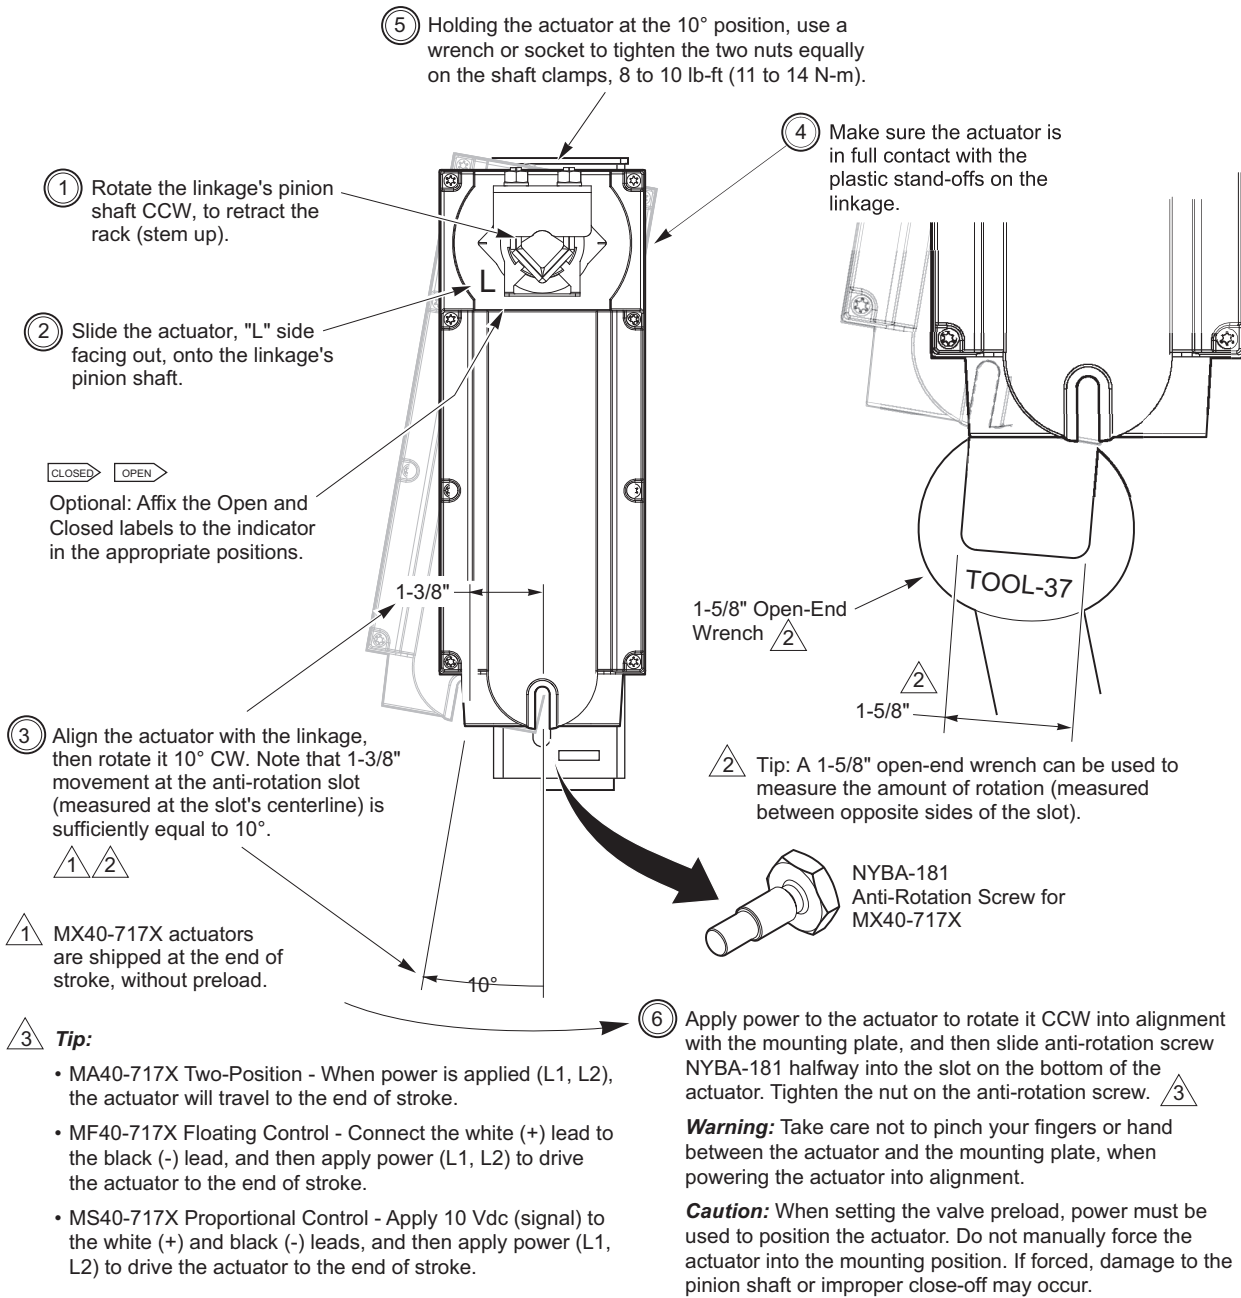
Mounting MX40-717X and Setting Up Actuator/Linkage/Valve Assembly.
